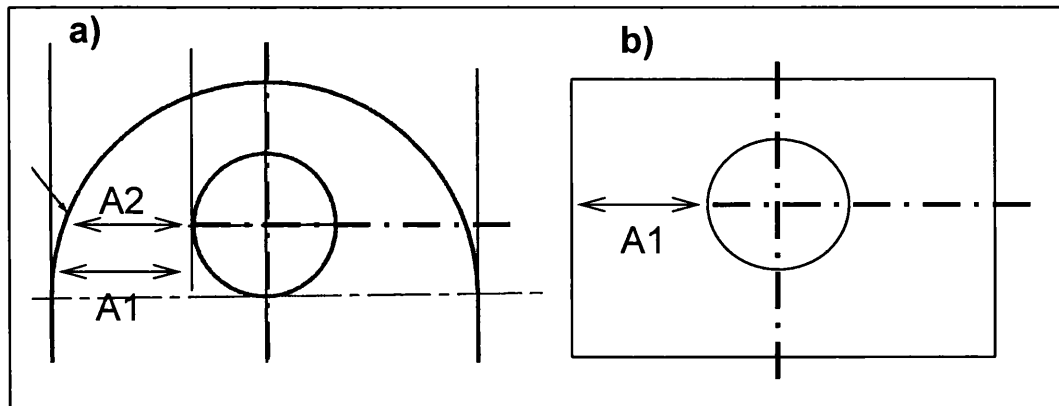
a) Showing Manufactured Lug Geometry and b) Proposed Improved Geometry
